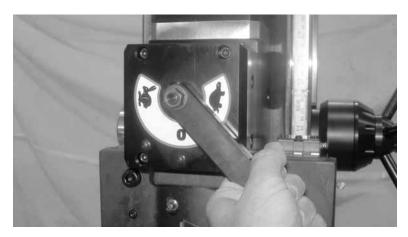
Set the speed select lever to slow for end milling. (Drills with two-speed gearbox only.)
